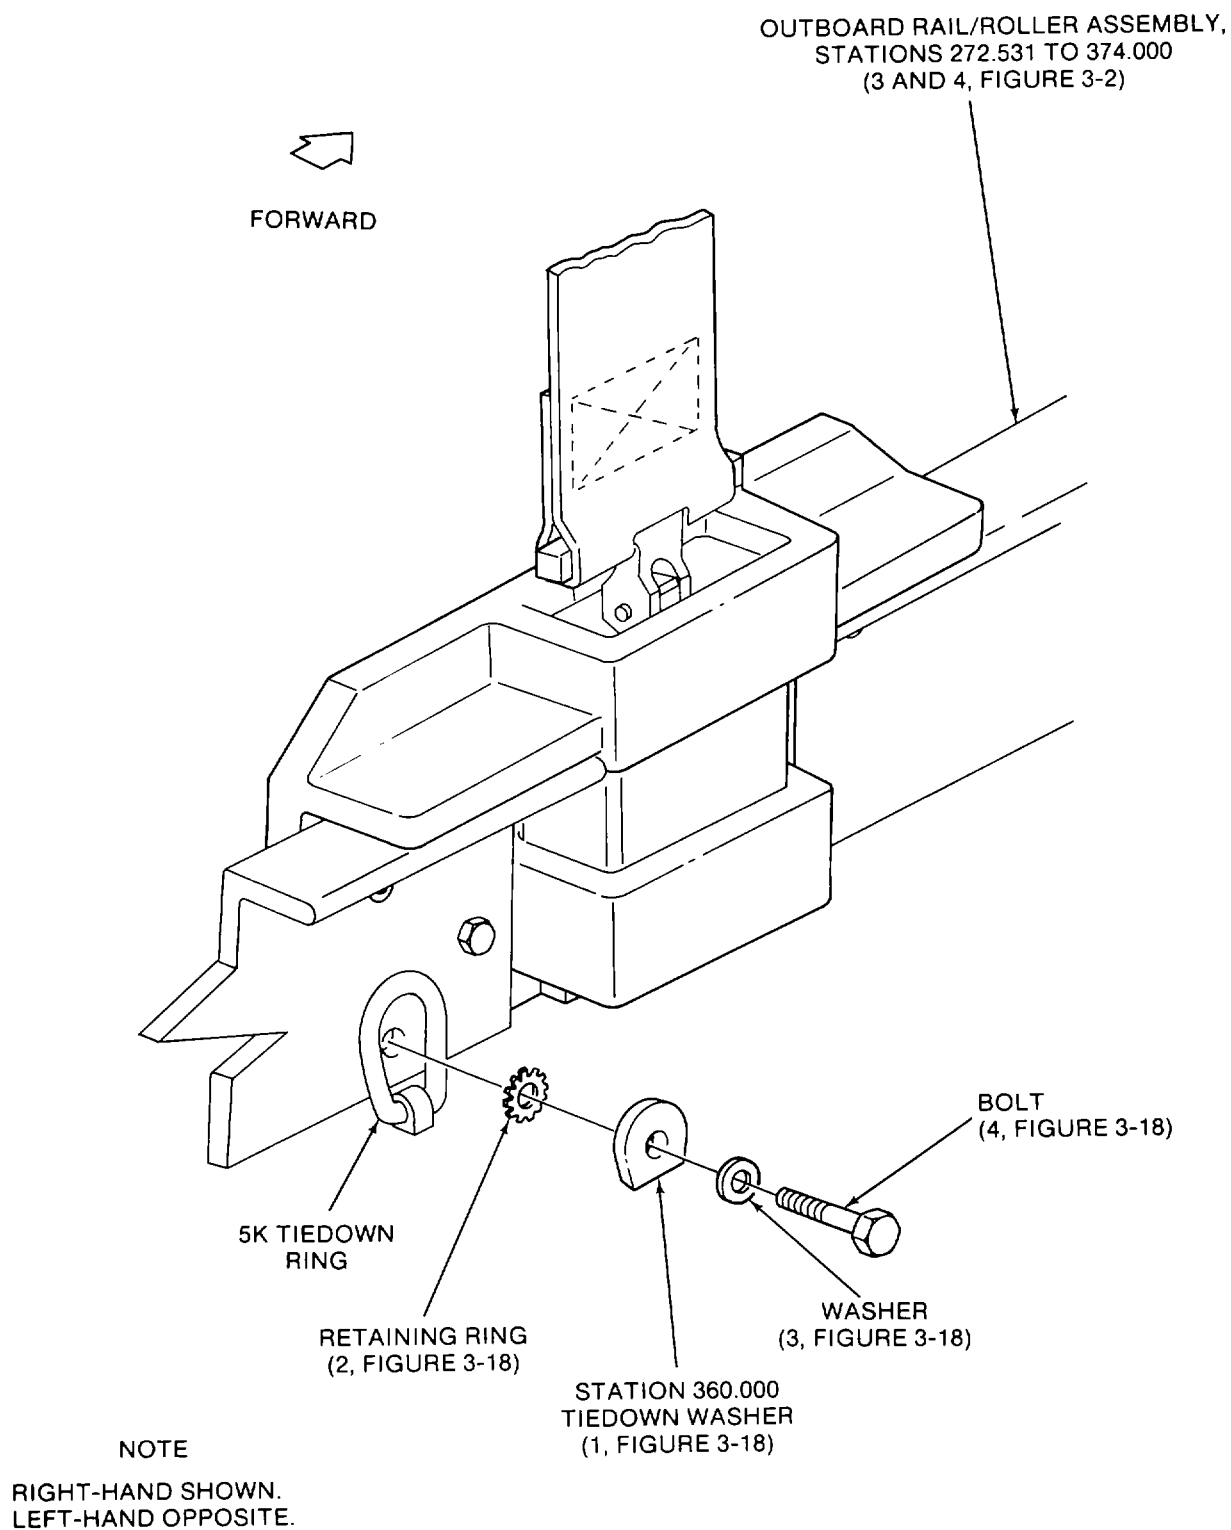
Connecting Outboard Rail/Roller Assemblies at Station 360.000
